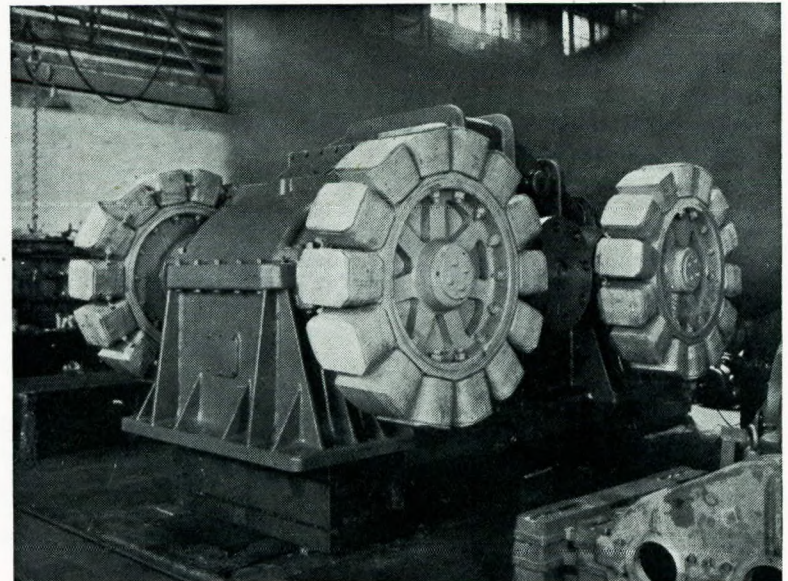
Slip coupling and gearing installation in the "Dagmar Salen".
